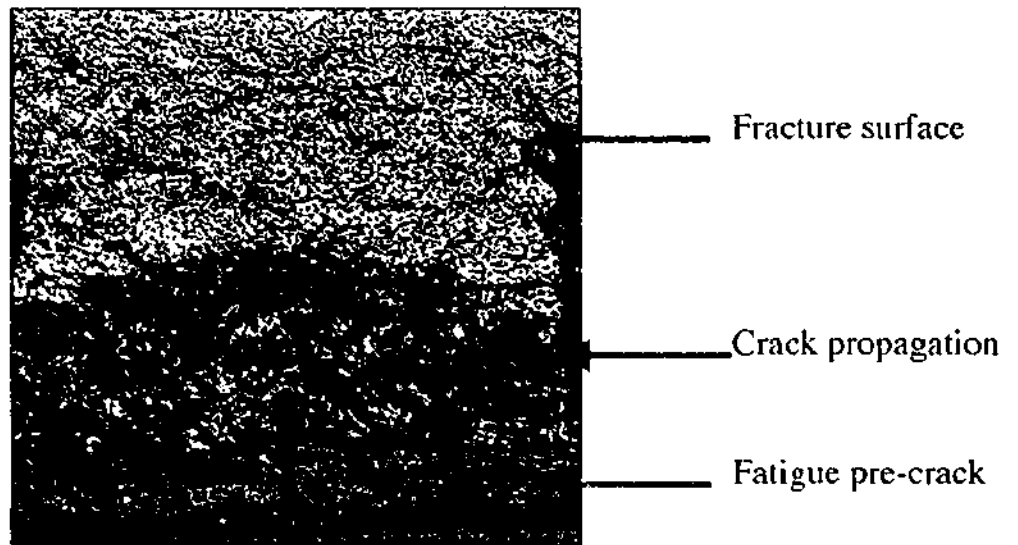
Fracture surface of a tested K_{Ic} specimen, showing the fatigue pre-crack, crack propagation and the brittle fracture surface.
